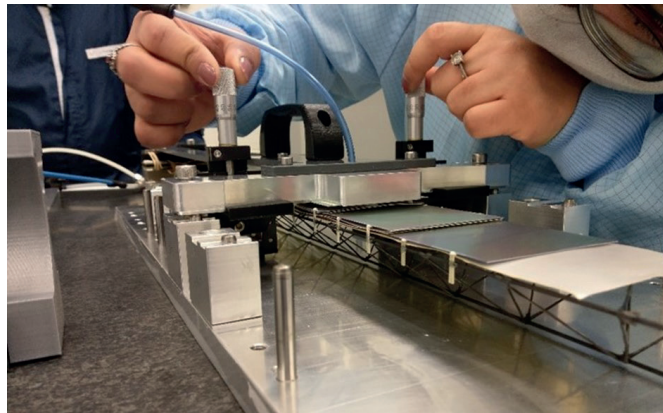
Ladder assembly: Precision tooling for the installation of silicon sensor modules onto a carbon fiber support.
